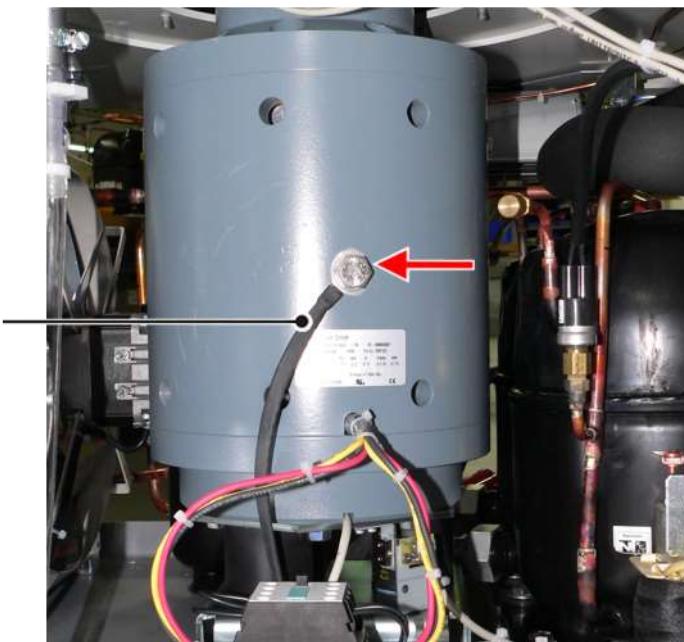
Position of the fastening screw of the earthing cable at the drive unit
